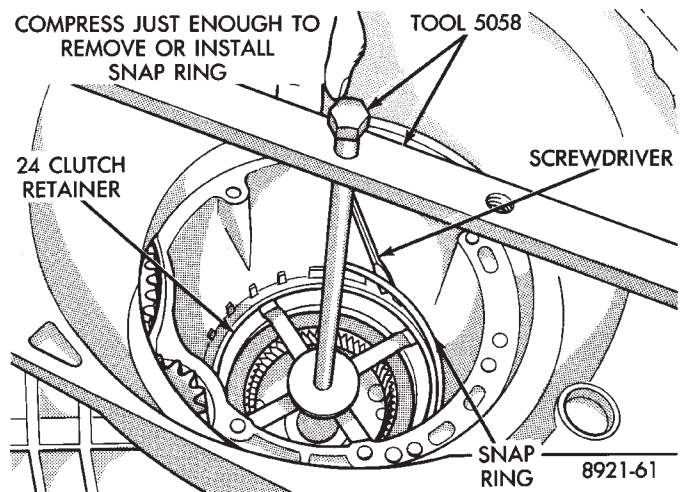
2 1/4 Clutch Retainer Snap Ring
